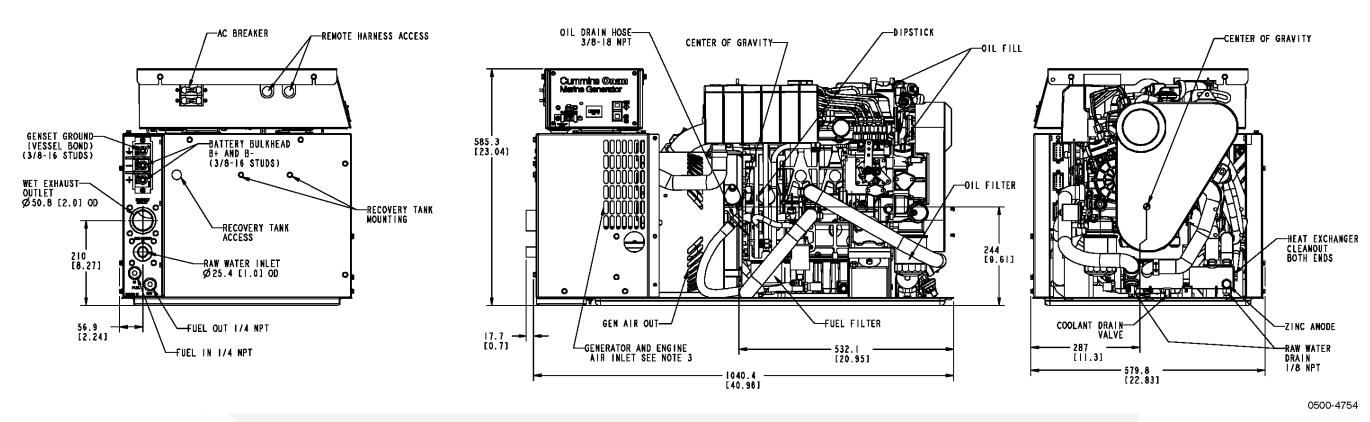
MDKBM AND MDKBN OUTLINE DRAWING (SHEET 2)
